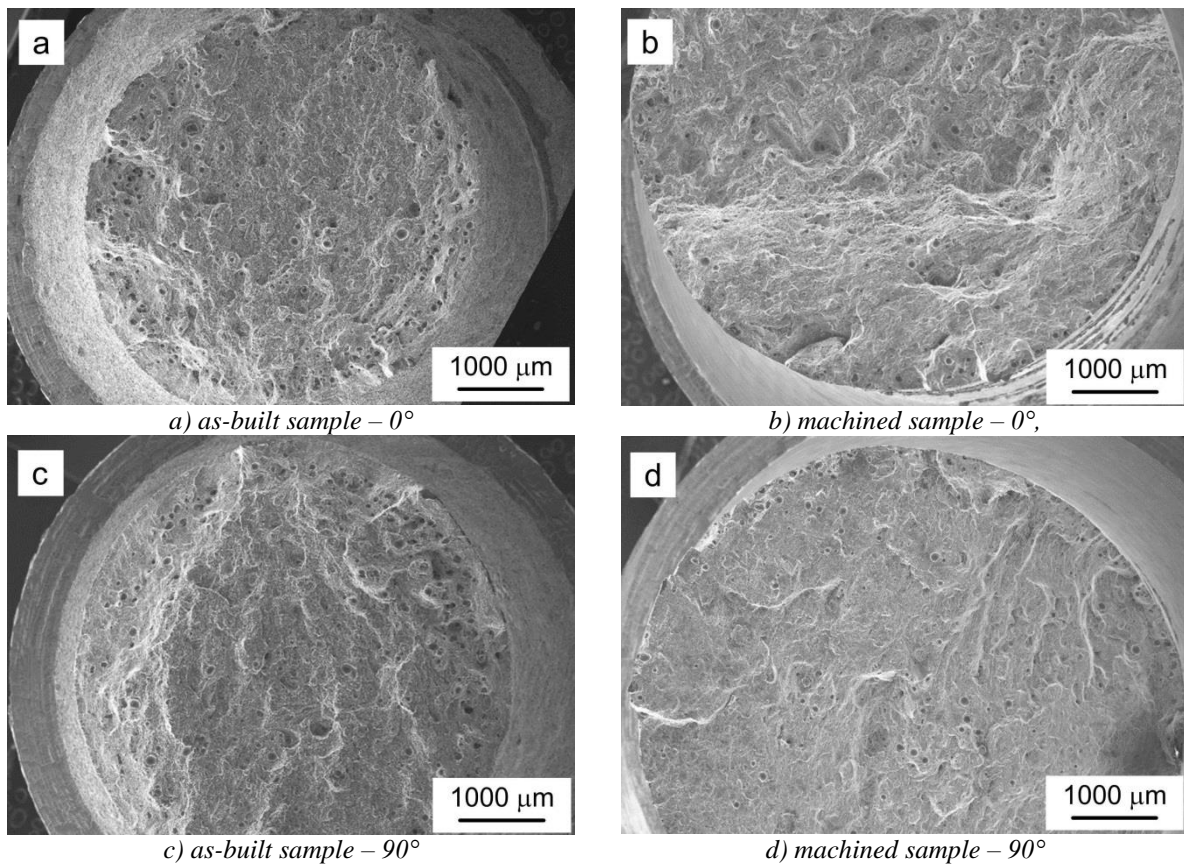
Fracture surface of specimens broken in tensile test – overview (SEM).
